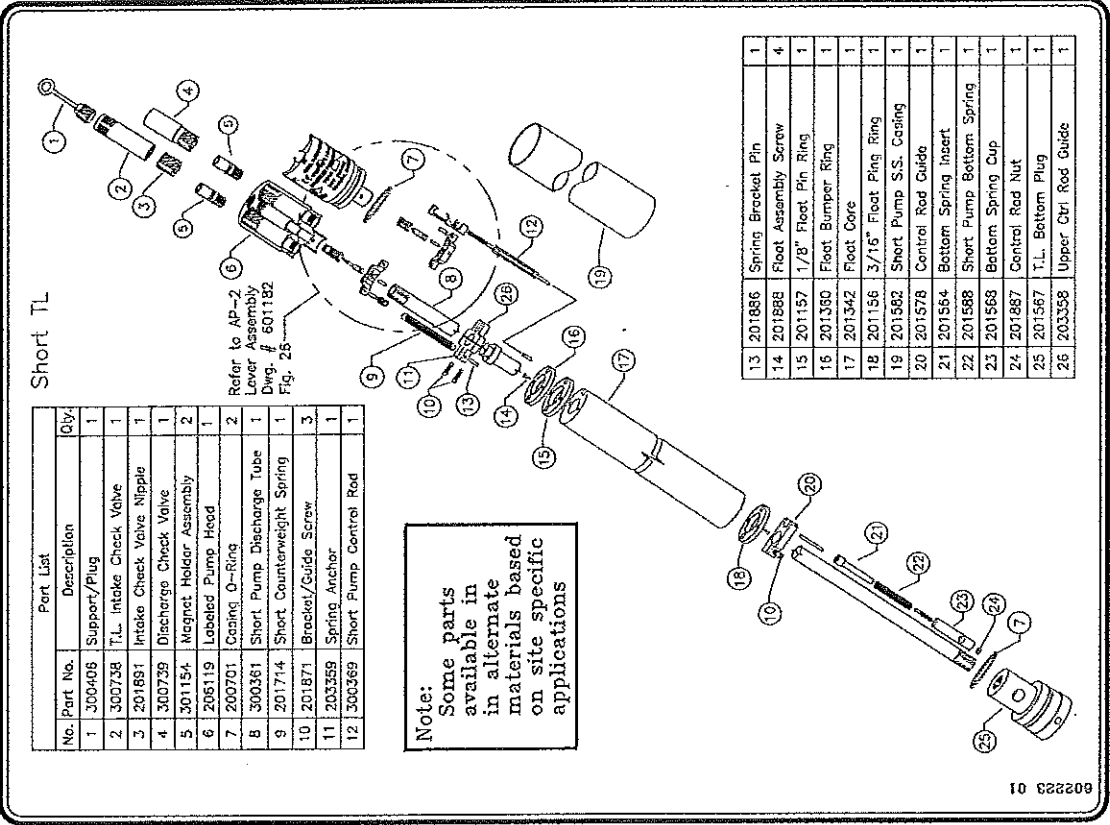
Exploded View of a Short Top-Loading AutoPump AP-2
